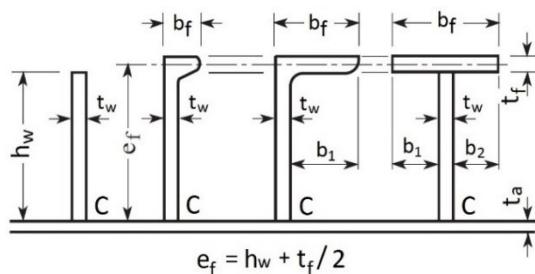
Main dimensions of typical longitudinal stiffeners
